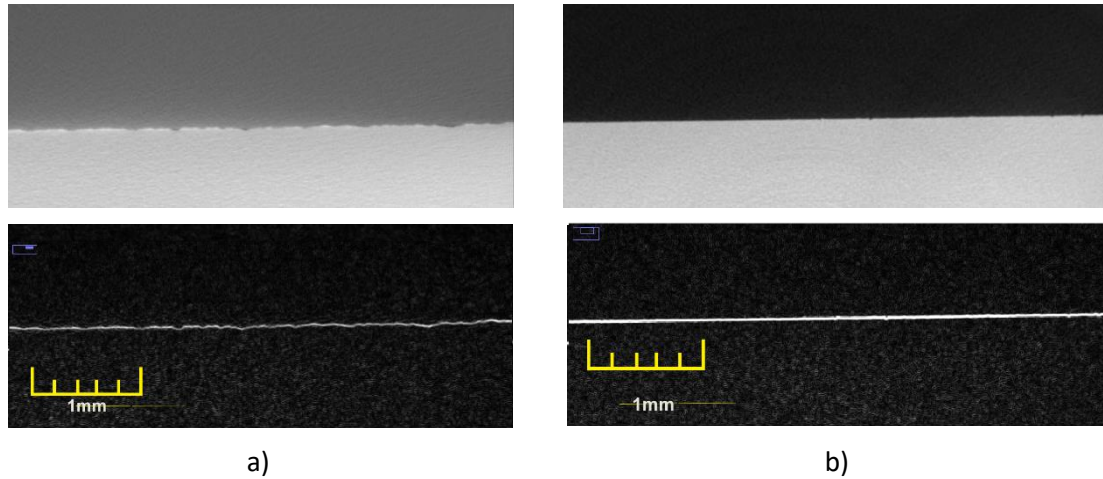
a) Surface Finish EDM b) Surface Finish Milled
